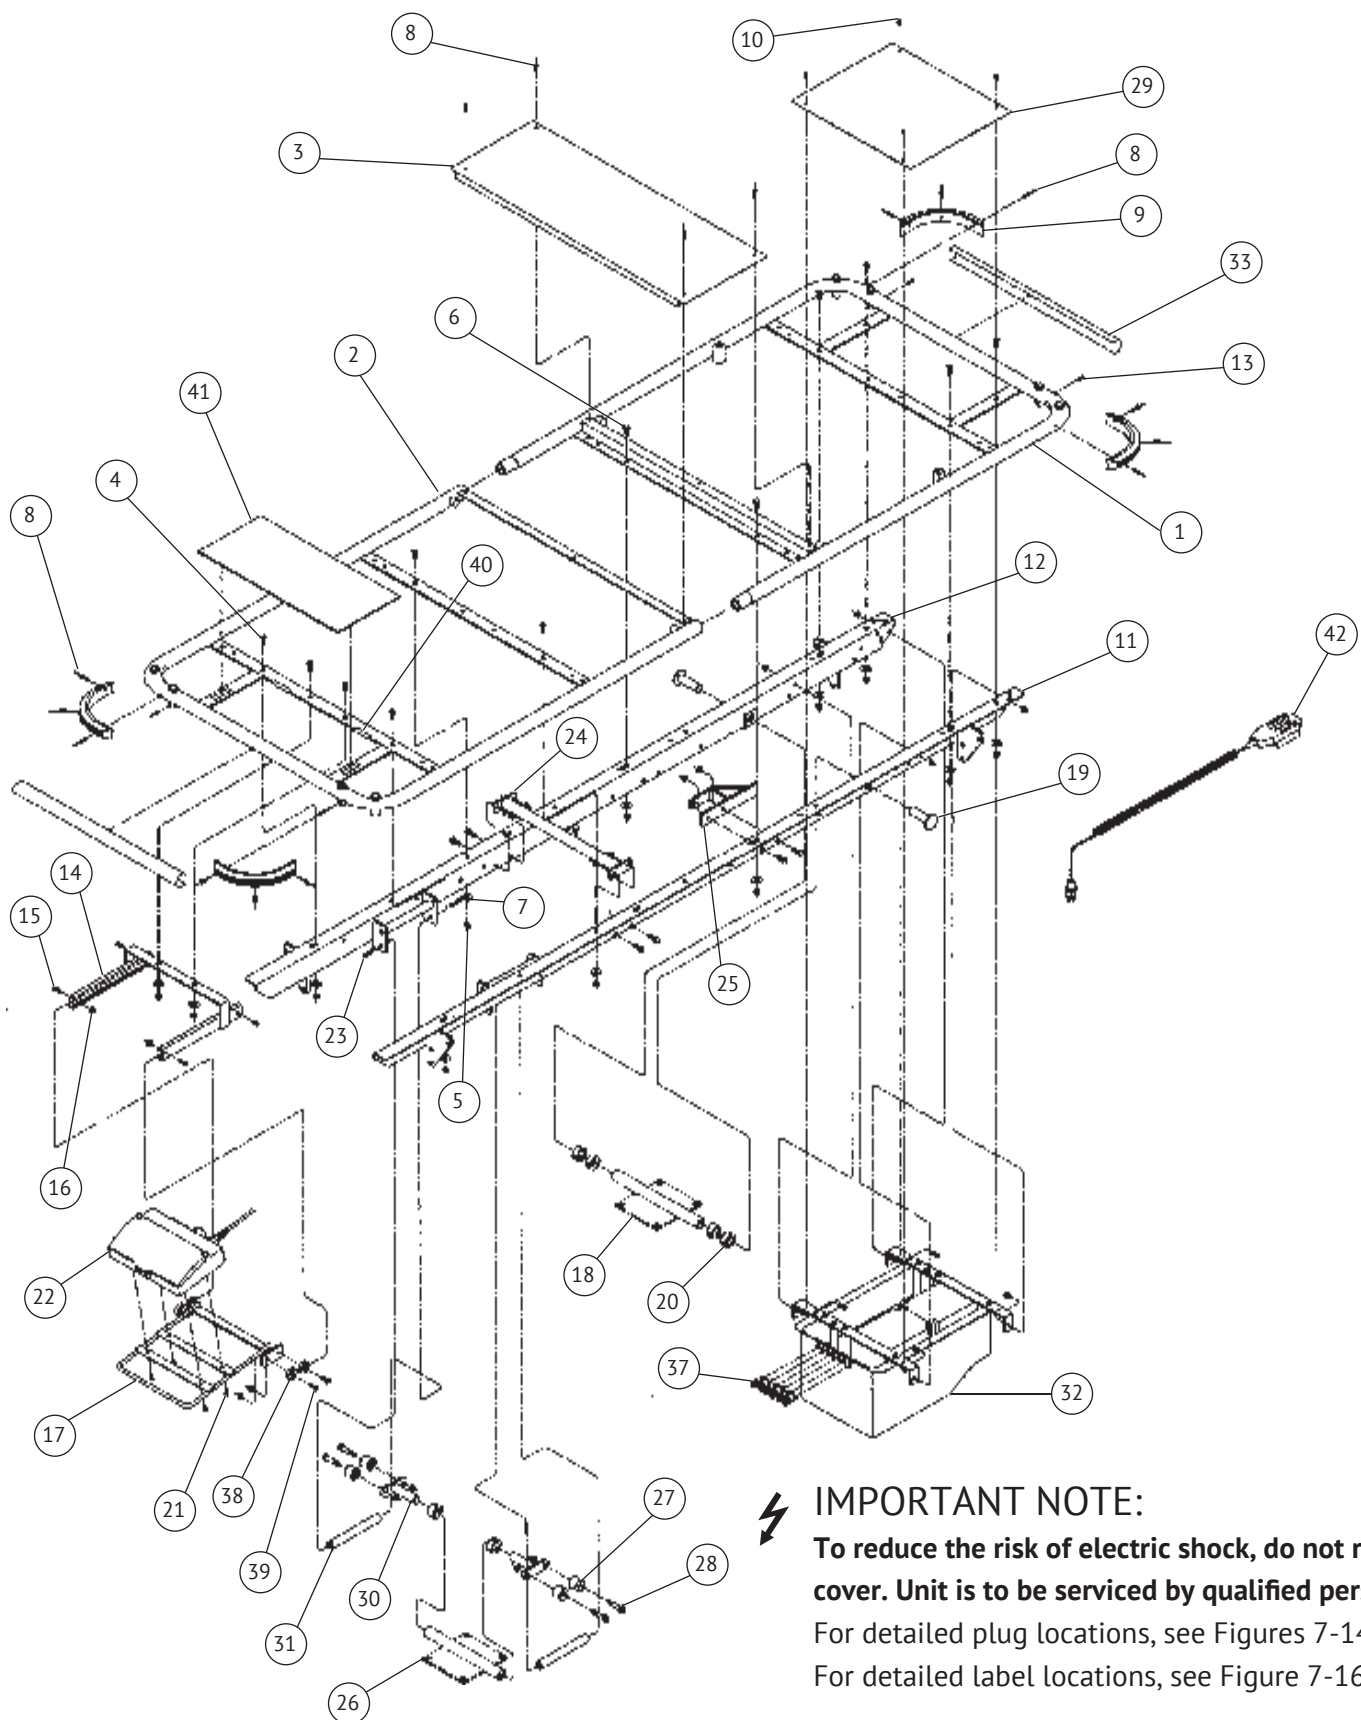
4E2/4D2 – DPA Top Assembly
